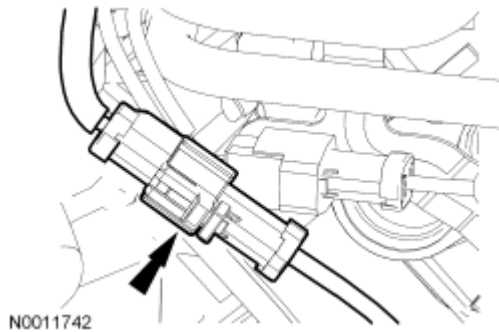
Locating Heated Oxygen Sensor (HO2S) Electrical Connector
